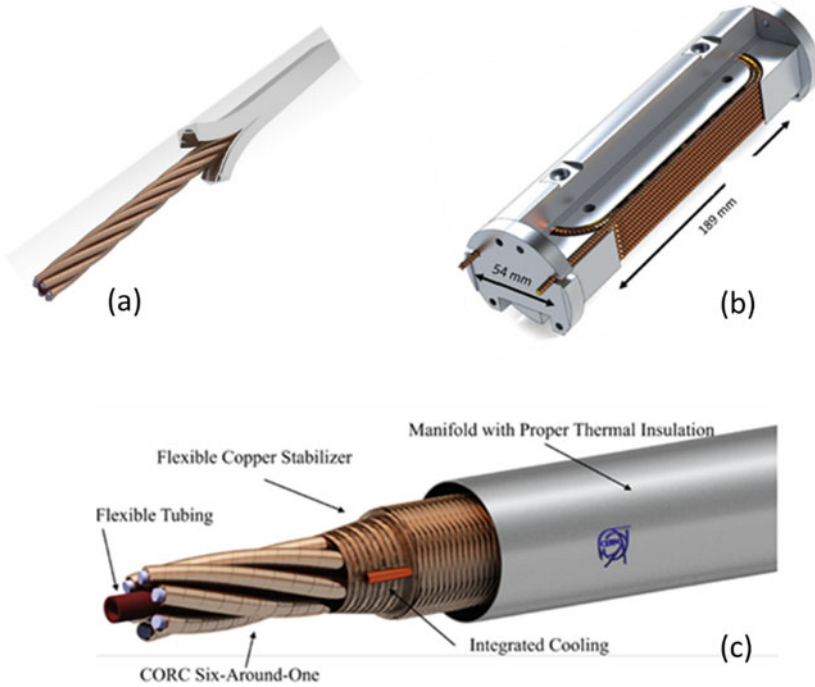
a The drawing of the ‘six-around-one’ type of CORC cable-in-conduit conductor (CORC-CICC) under development at CERN. b 3D computer generated picture of a demonstration racetrack coil built by CERN using CORC wire supplied by ACT. The dimensions of the coil are given in the picture. c Conceptual image of CORC ‘six-around-one’ bus bar under development at CERN. The ‘six-around-one’ bundle has multiple layers of copper braid wrapped around it for stability. A central tube and the gaps between the layers provide cooling channels [15]. Pictures courtesy of Herman ten Kate, CERN and University of Twente
